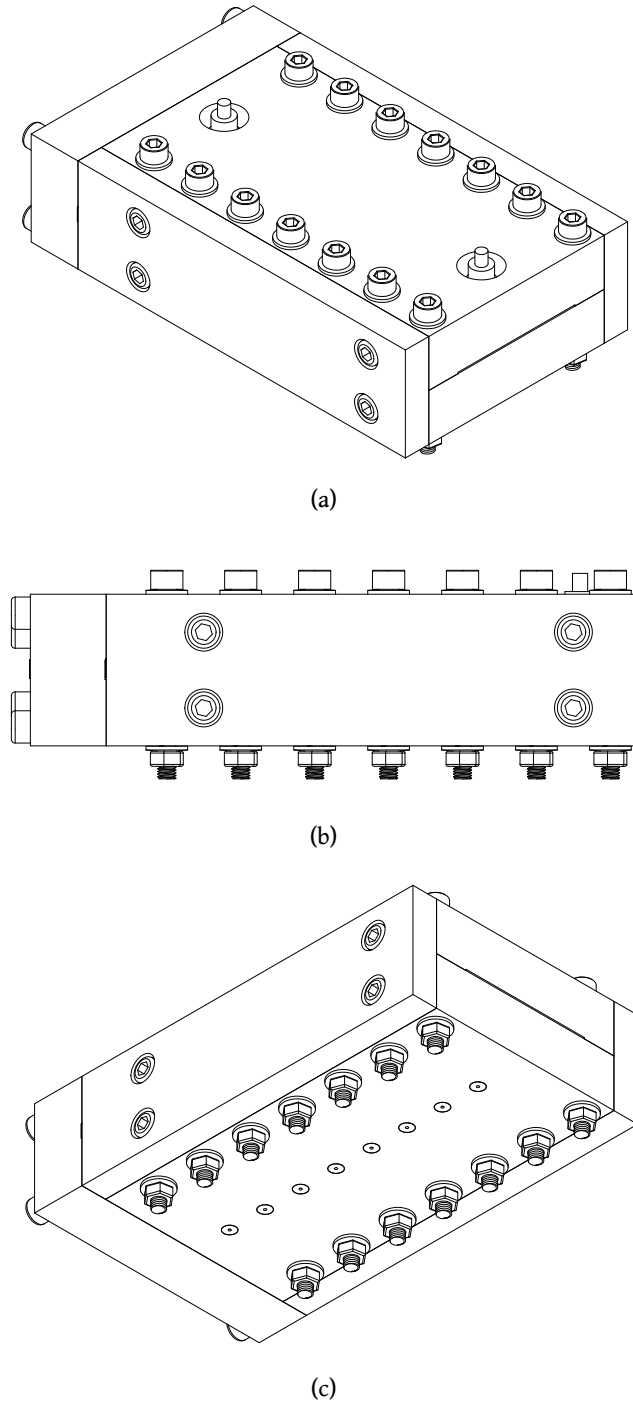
Channel structure drawing [9]: (a) view on the pressure sensors plate; (b) side view; (c) view on the temperature sensors plate.
